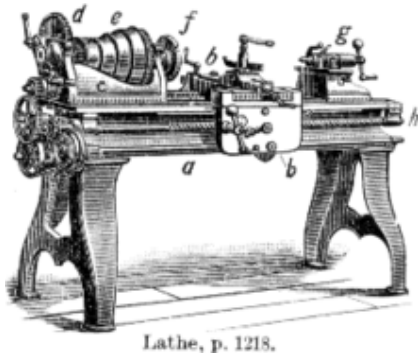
Lathe for Machine Tools Production was invented during industrial revolution in the 18th Century. Metal parts used to maintain the textile machines, clocks and watches etc were produced in the machine shops using lathe machines invented during the industrial revolution. Some Engineering Faculties in Nigeria have no operating modern lathe machines for teaching engineering students in this 21st Century.
